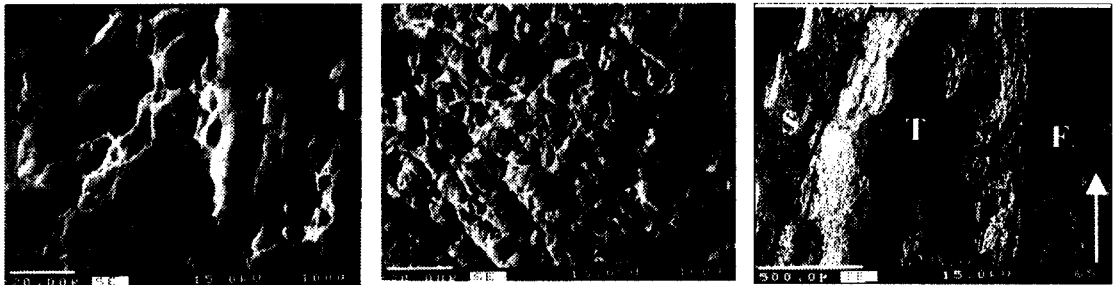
Macroscopic fractured surface images of the irradiated and unirradiated specimens (Arrow:crack growth direction, P:pre-cracking area, F:flat fractured area, T:transition zone, S:slant fractured area)
